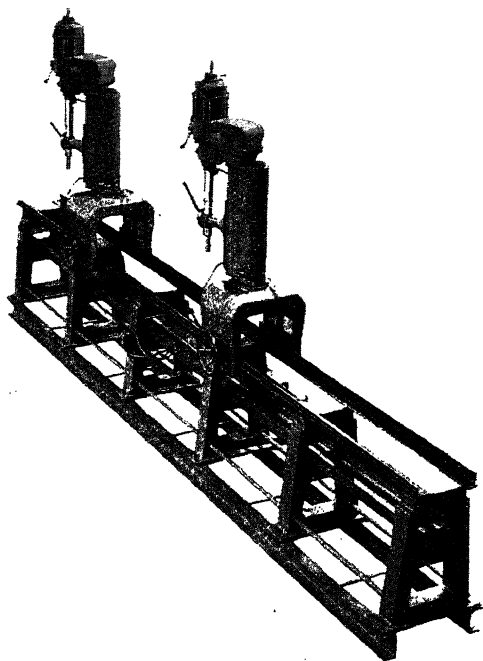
THIS MACHINE IS SPECIALLY DESIGNED FOR DRILLING WING-SPARS, STRINGERS, AND SIMILAR LONG PARTS. (*Jones & Shipman Ltd.*)
